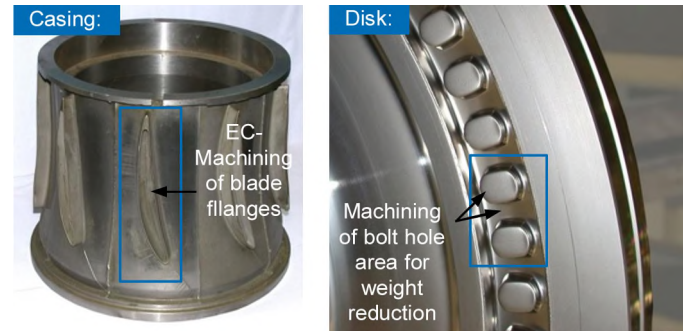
EC-machining of blade flanges on jet-engine casing (left) and weight reduction at bolt holes on turbine disc (right), [62].
